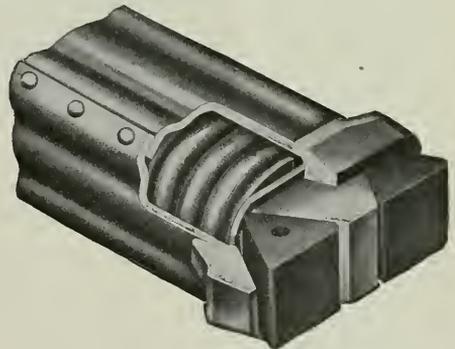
The Type KD Gear Has a Stronger Barrel than the Old Type K
